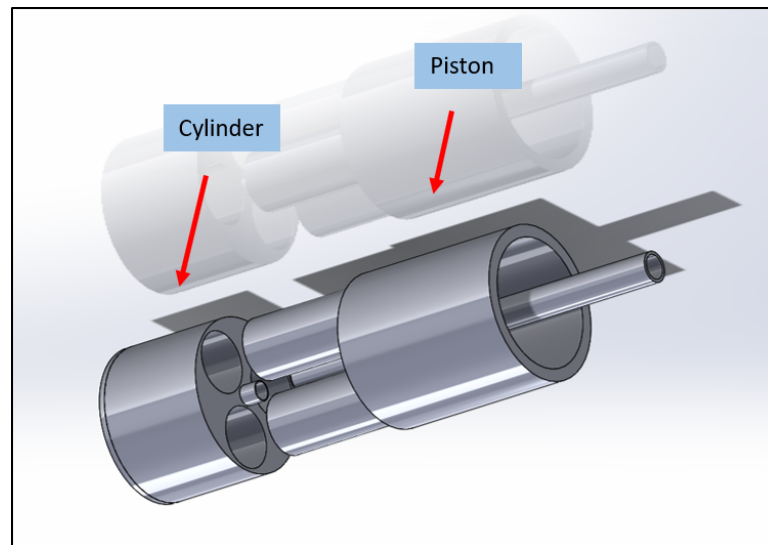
Schematic drawing of isothermal core elements of compressor in Design C.
